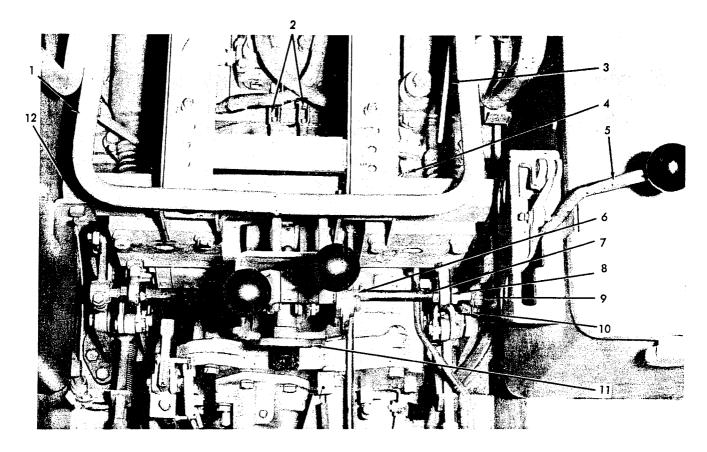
Transmission Installed Prior to Removal of Seat Frame (Early HD6EP Shown - HD7G Similar) (T-35121)
